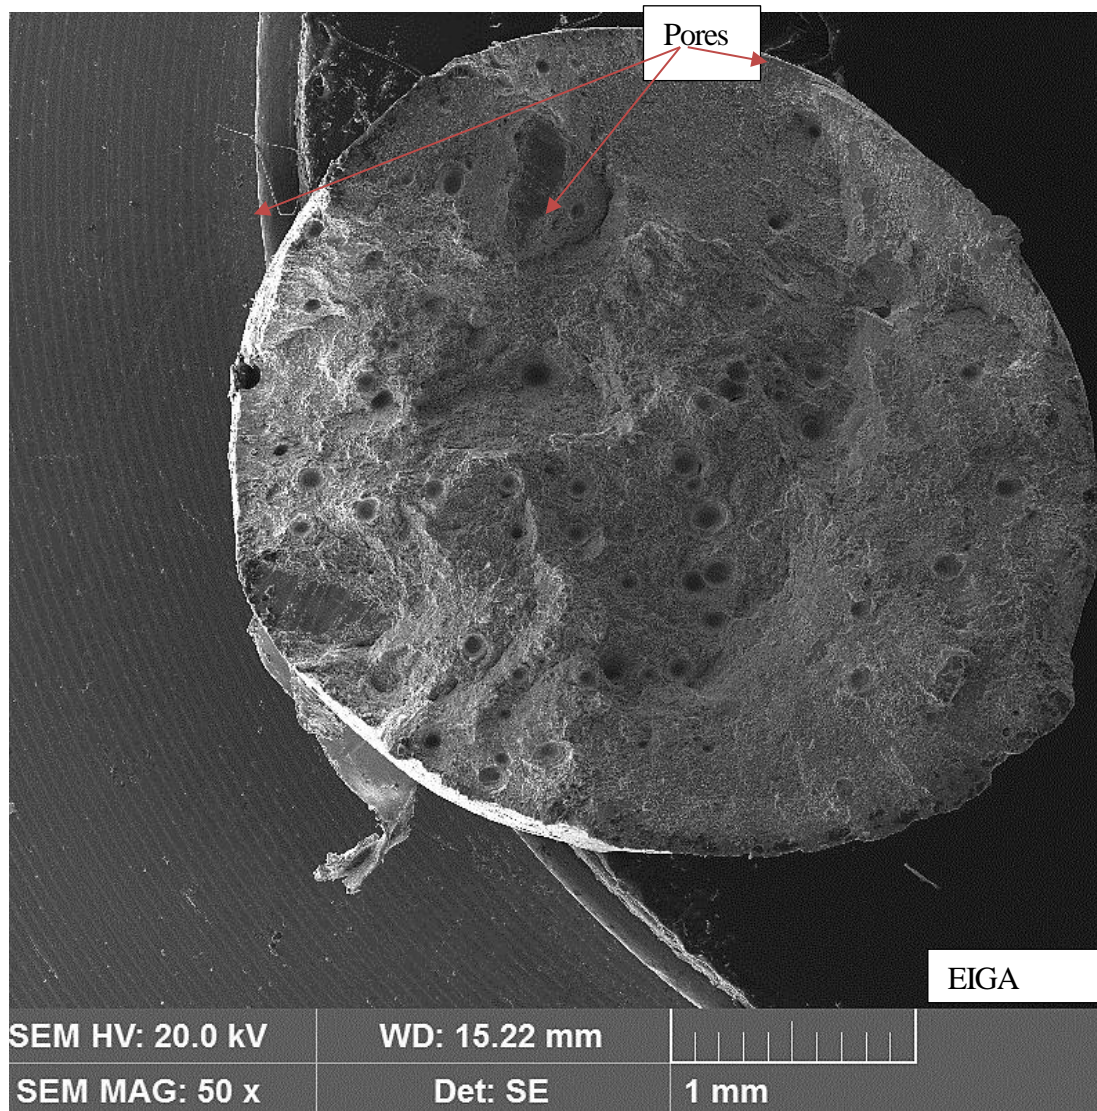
Fractography of EIGA as-built specimens with indications of gas pores
